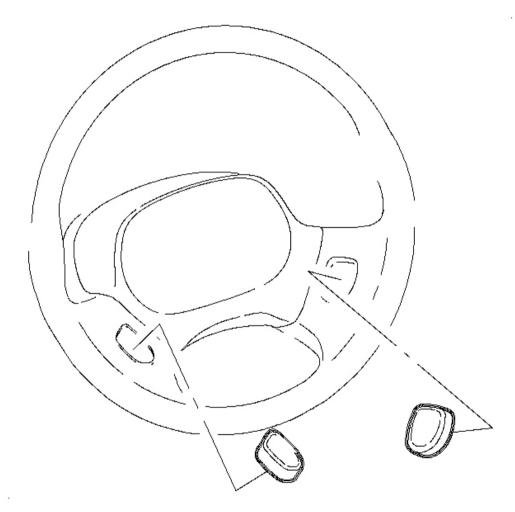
Removing Steering Wheel Shroud & Screws Courtesy of GENERAL MOTORS CORP.
